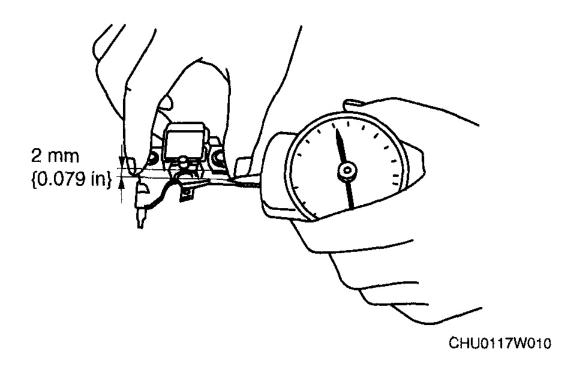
Measuring Force Of Brush Spring Using Spring Pressure Gauge Courtesy of MAZDA MOTORS CORP.
